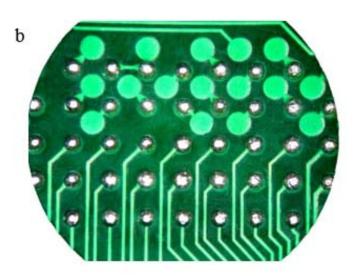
Soldered power contacts (a) and matrix structure of solder balls (b) on PCB
